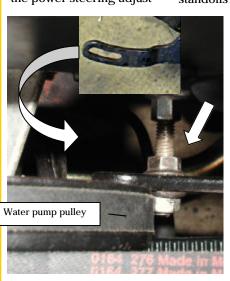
Power steering water pump adjustment bolt. View down from top of engine.
